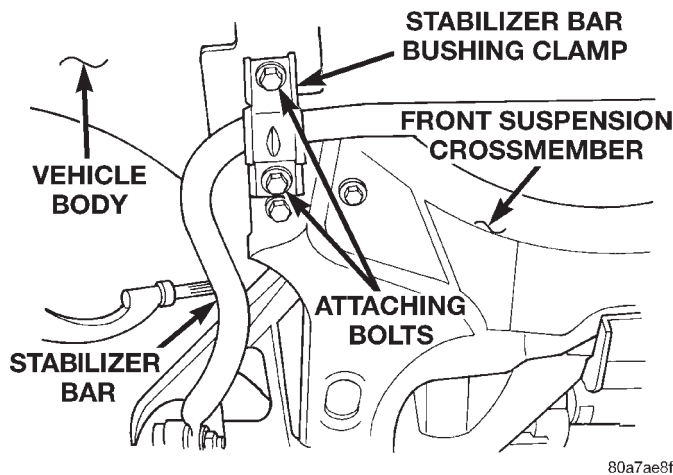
Stabilizer Bar Bushing Clamp Attachment To Vehicle
